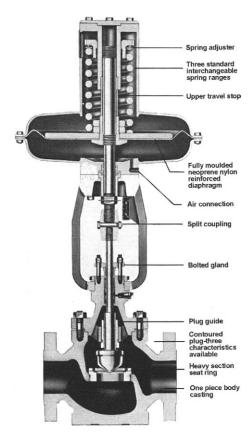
Single seat globe valve with pneumatic diaphragm
